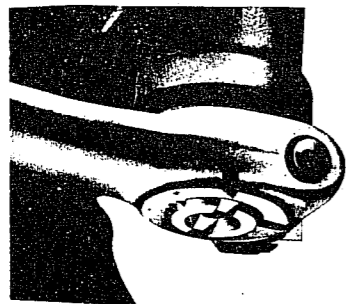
On installation, the lower surface of the drop arm should be flush with the bottom of the slot in the roller shaft.
